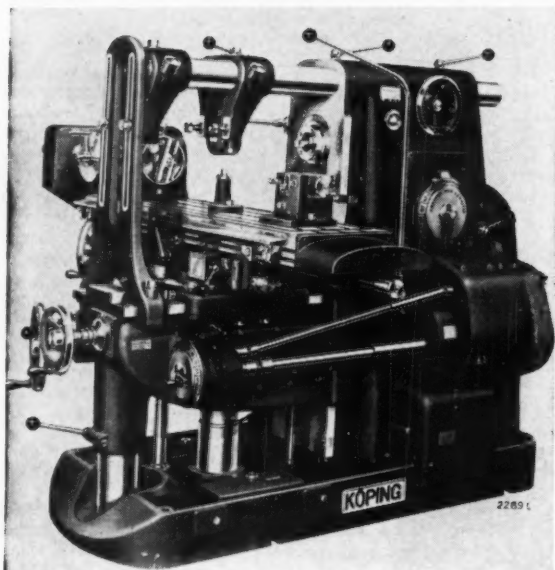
Köpings Mekaniska Verkstads AB universal milling machine
